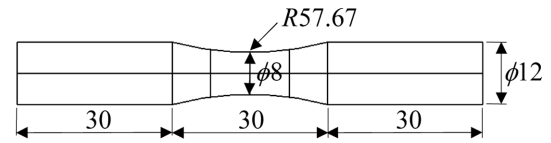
Dimensions of Al7075-T6 tensile specimens
